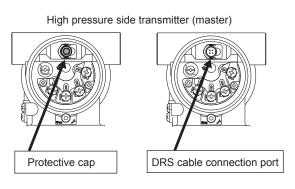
Mounting the Cable Gland for the DRS Cable
